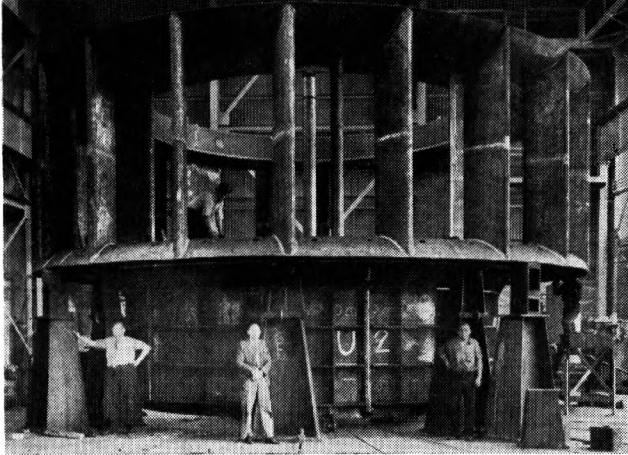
WELDED SPEED RING; GUNTERSVILLE PROJECT
